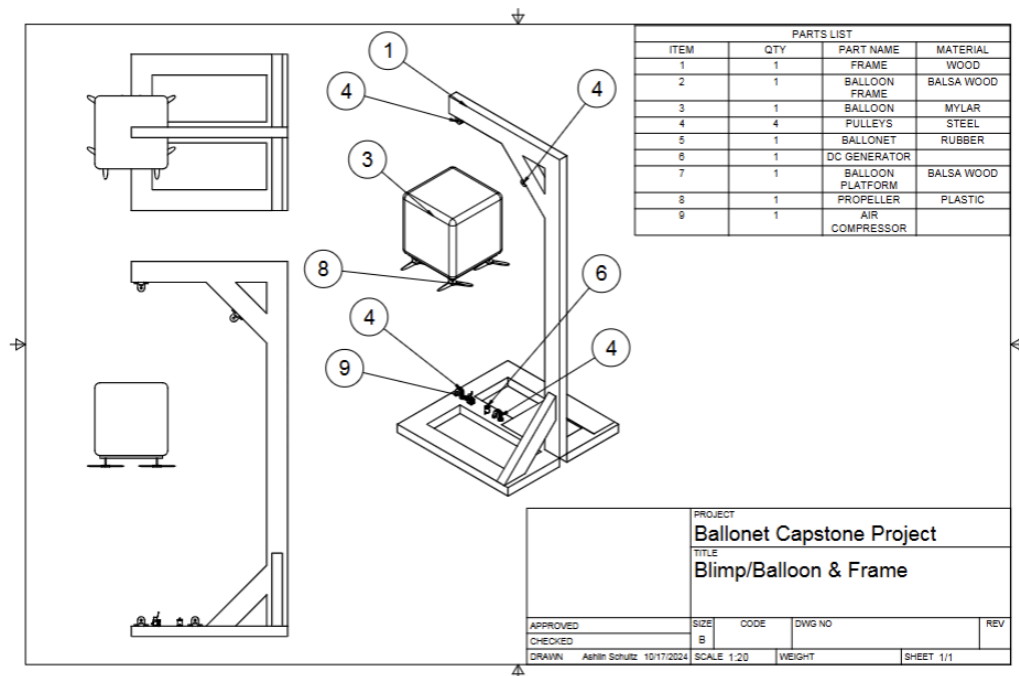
Rough CAD assembly model showing all components in place. Important to note that the electronics involved are beyond the scope of this CAD model.
